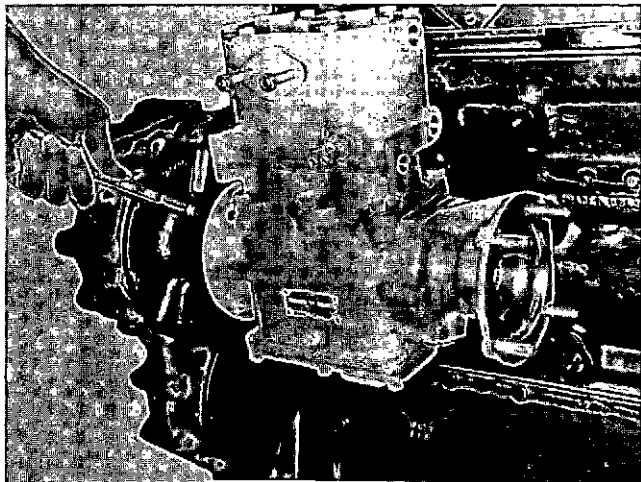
, V414212. Installing Bendix-Westinghouse compressor
